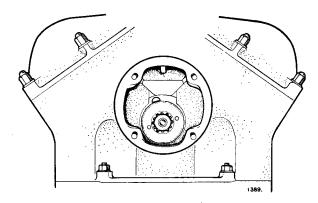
The serrated plate for adjustment of the top timing chain is accessible after removal of the engine breather housing
